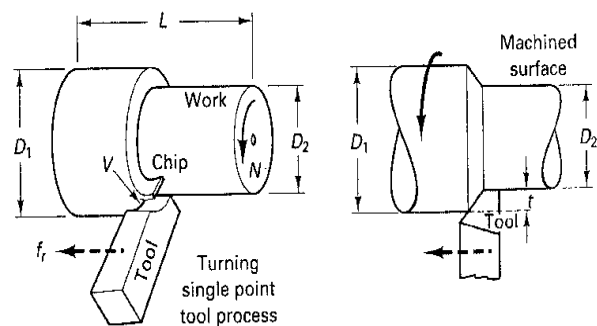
Turning Operation Using Single Point Cutting Tool
